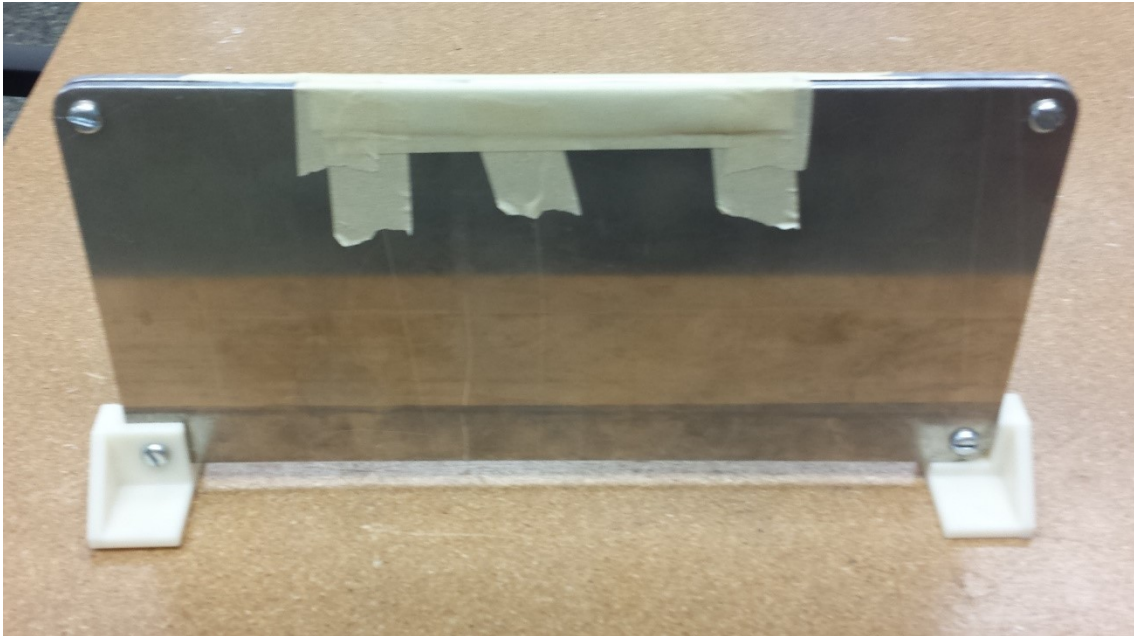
Photograph of the jig used in the manufacture of the LHTES modules
